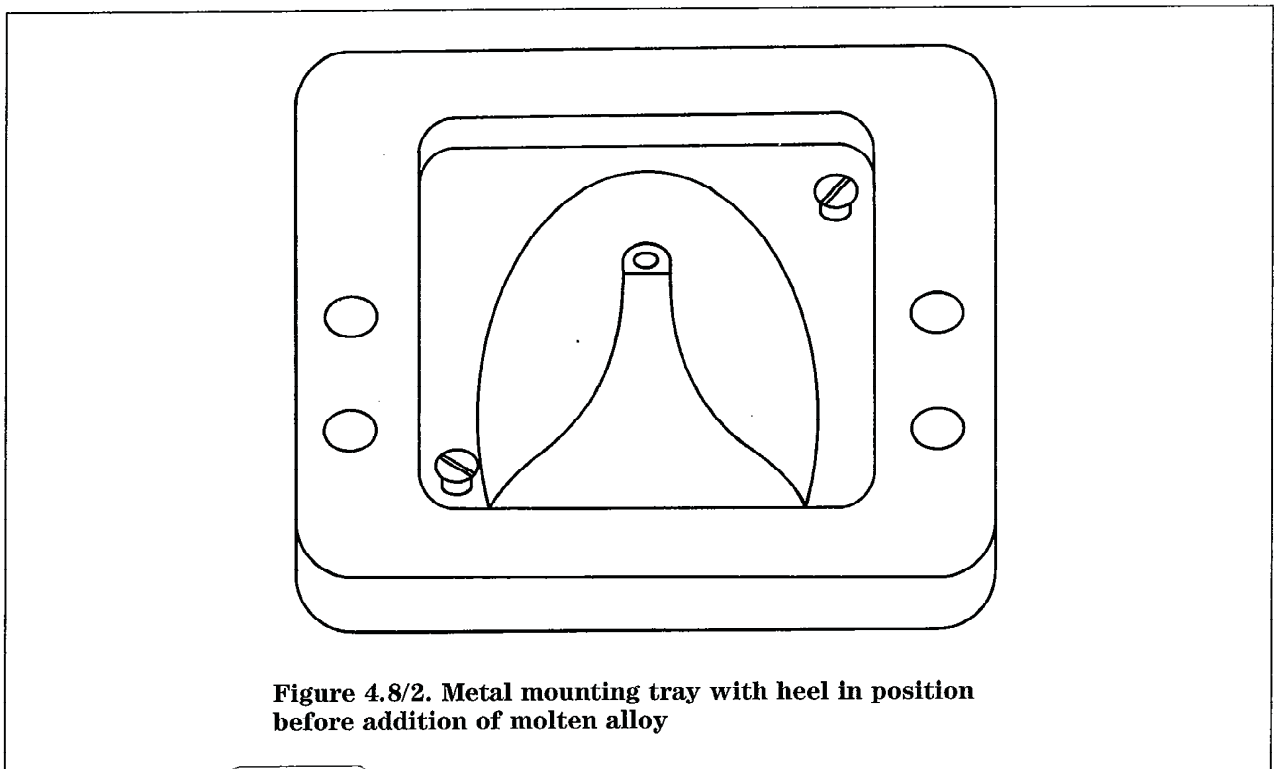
/2. Metal mounting tray with heel in position before addition of molten alloy
